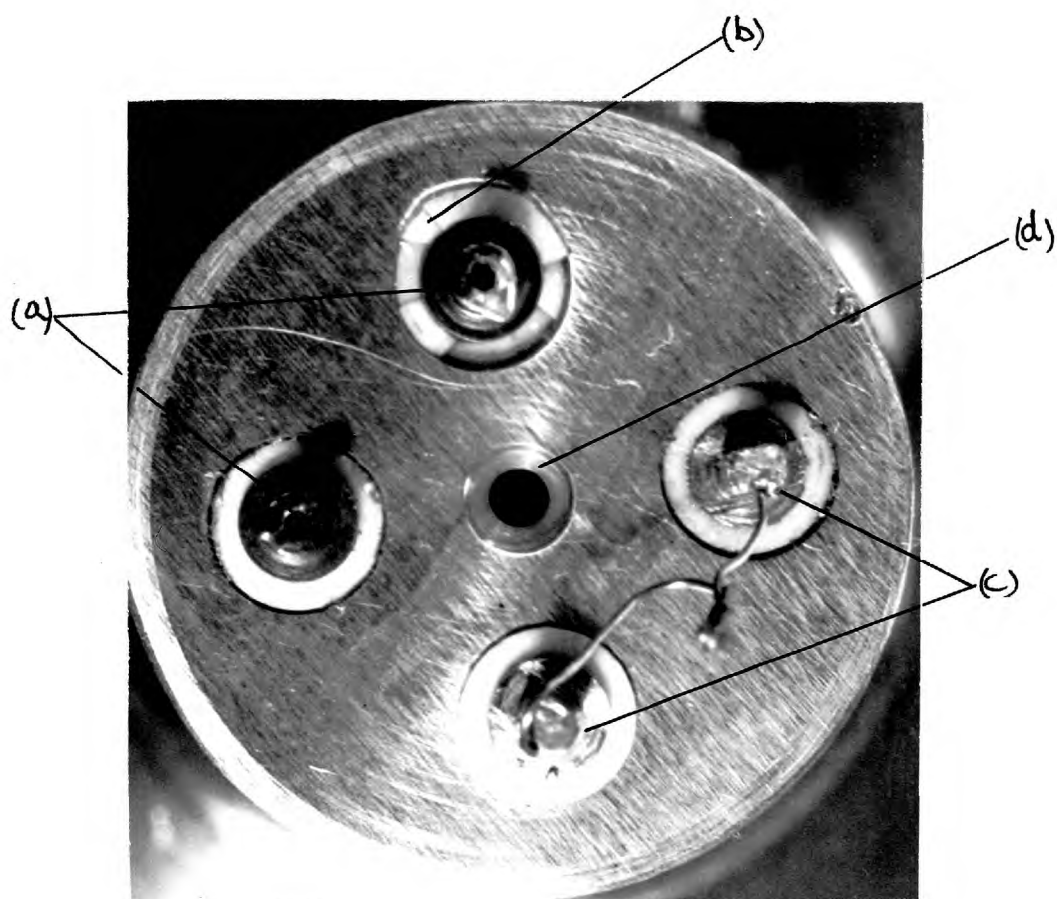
Four Terminal Assembly with Cracked Insulator.
